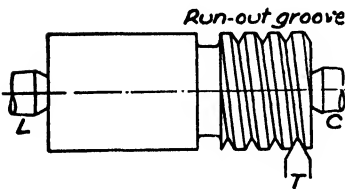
Thread Cutting, Employing a Run-Out Groove.
